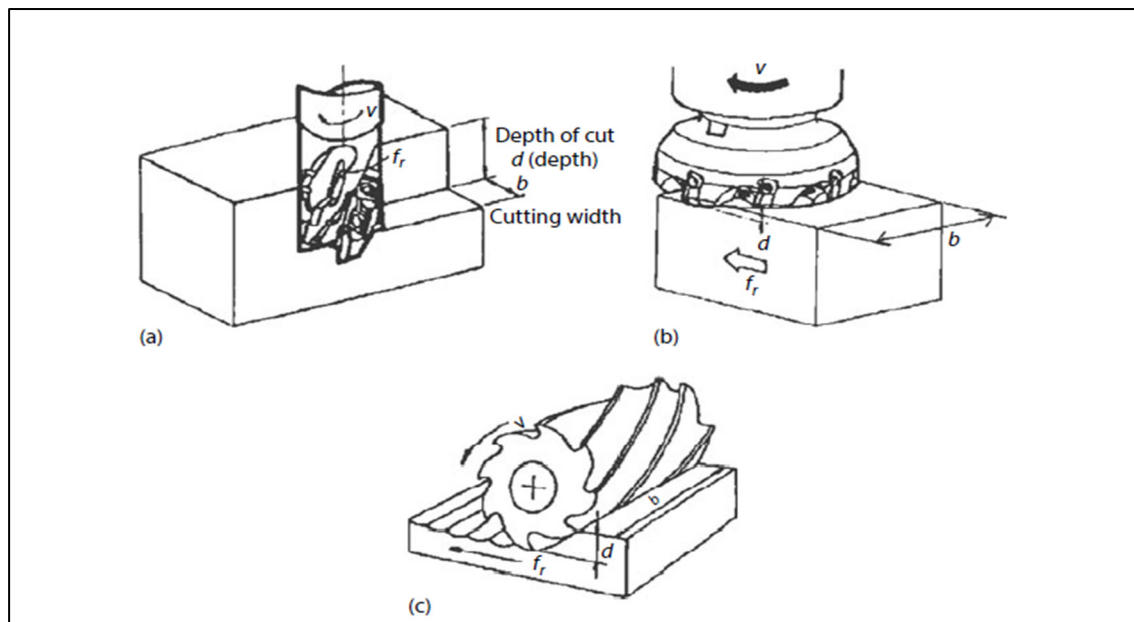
Milling operation types: (a) end milling, (b) face milling, and (c) peripheral milling
